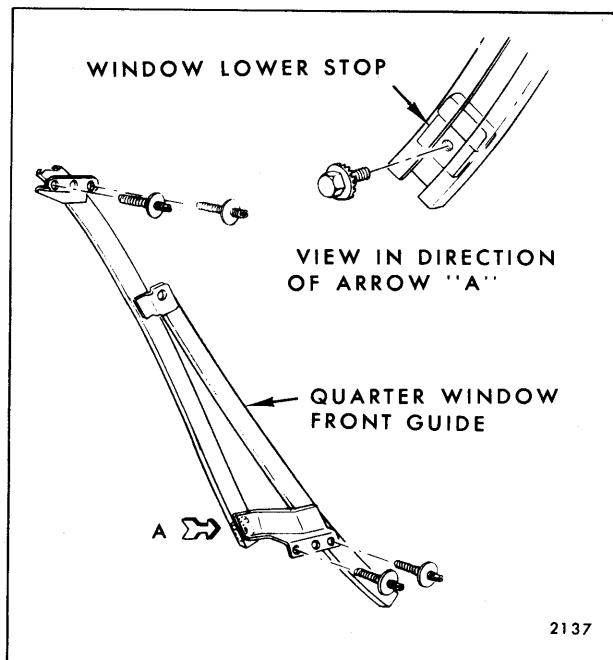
Rear Quarter Window Lower Stop Adjustment - Styles so Equipped
